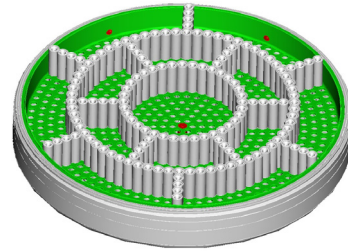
75-tonf Thrust Chamber Mixing Head
